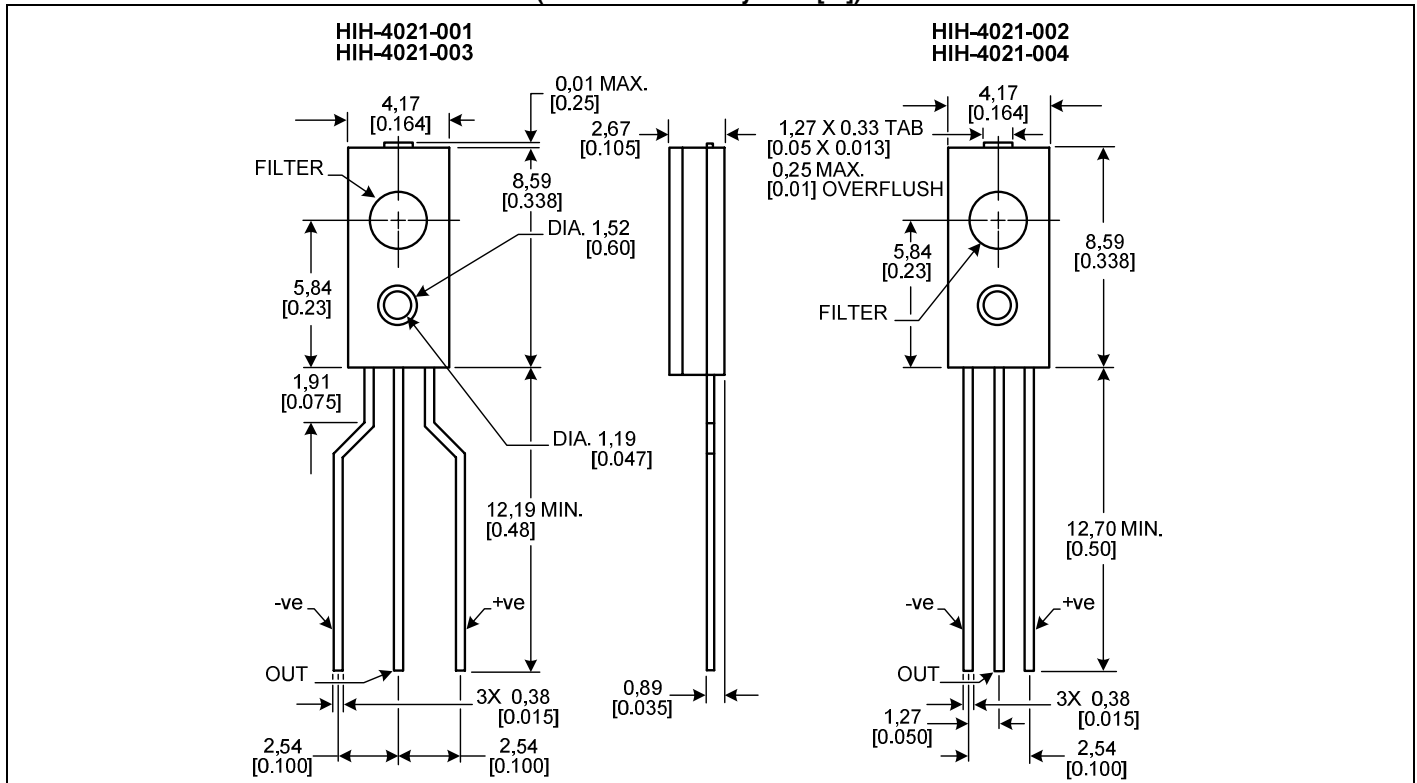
HIH-4020 MOUNTING DIMENSIONS (For reference only. mm/[in])
